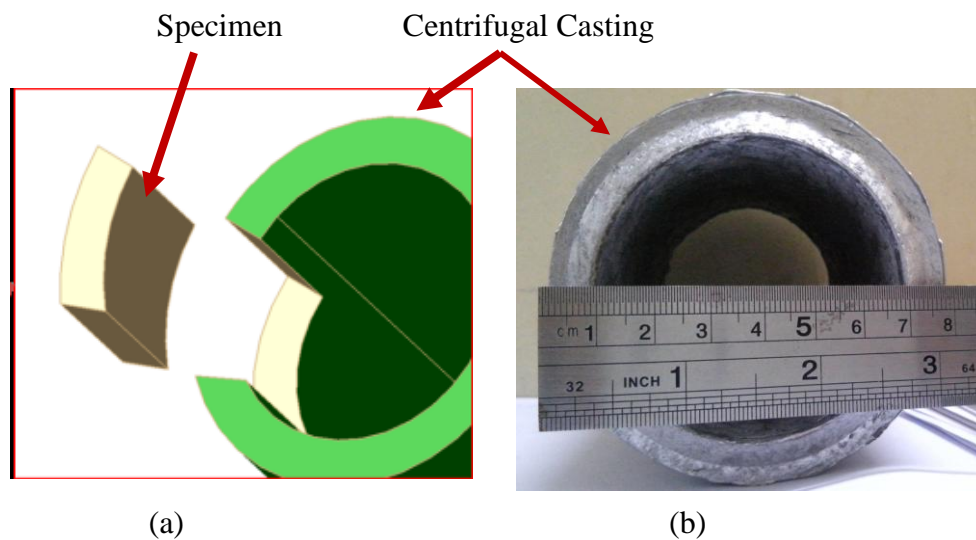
Test samples a) Specimen considered from the centrifugal casting
